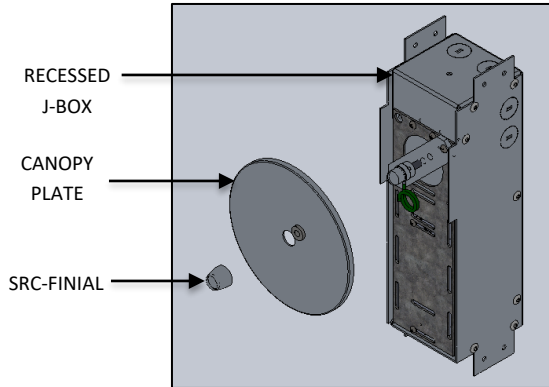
FINIAL AND CANOPY DISASSEMBLY
